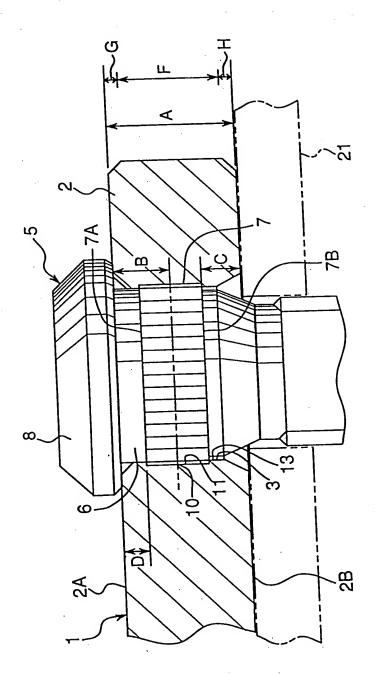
is a sectional view of an automobile wheel bearing having the conventional fastening structure.
